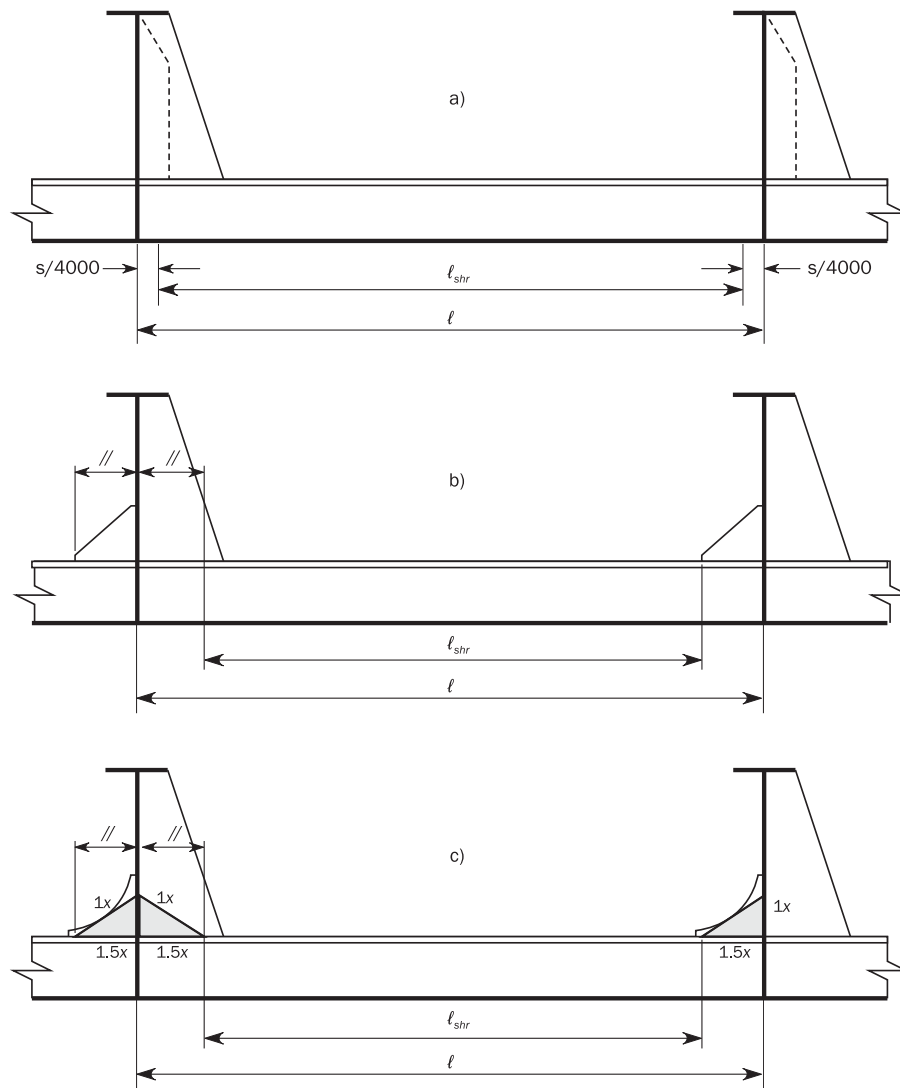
Effective shear span of stiffeners supported by web stiffeners (single skin construction)
